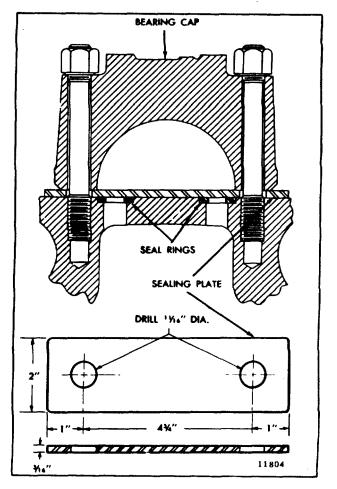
Sealing Plate Details for Pressure Testing Cylinder Block
